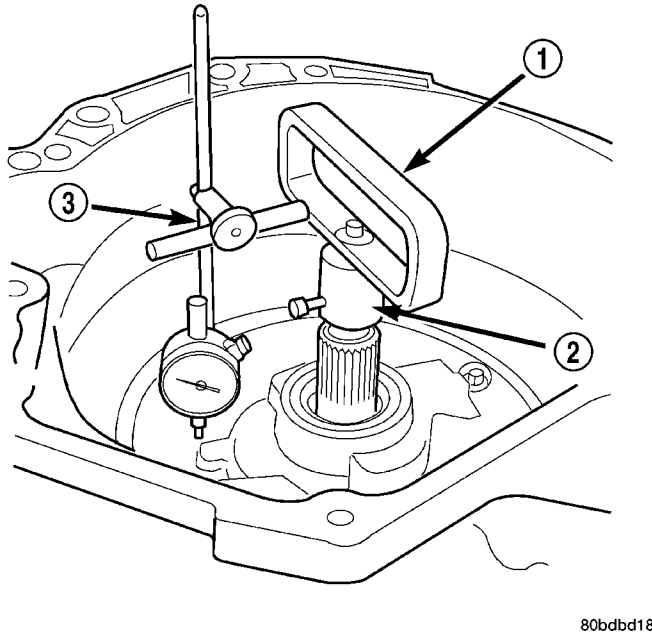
Measure Input Shaft End Play Using Tool 8266—Typical
